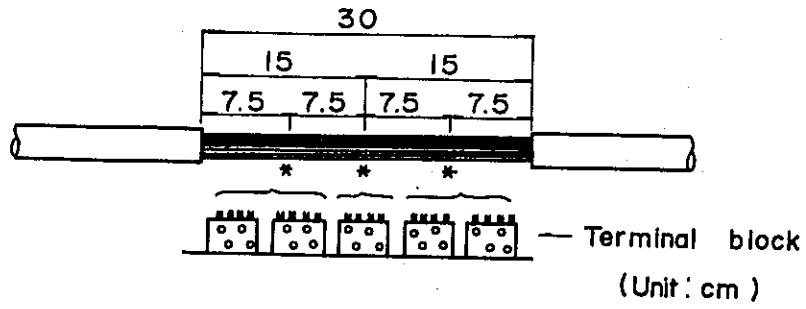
Cutting the Cable Conductor
